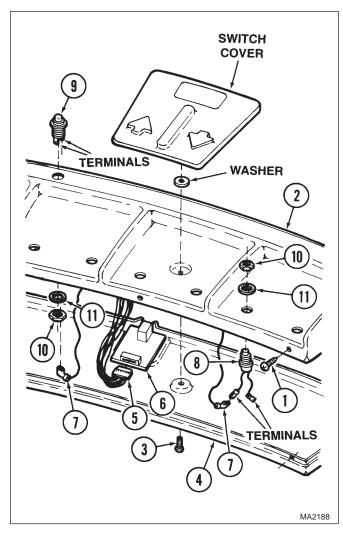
Foot Control Assembly Switch Removal / Installation
